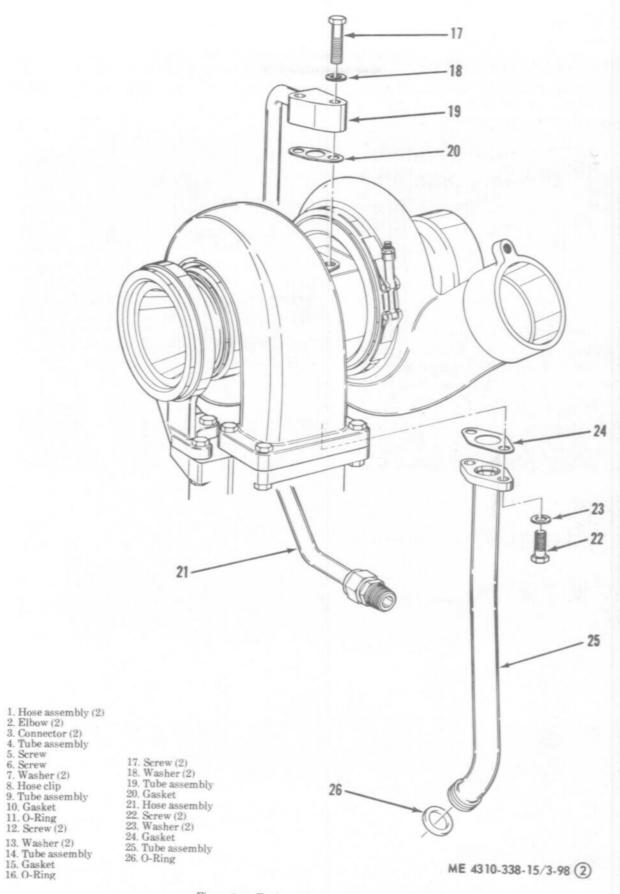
Engine oil lines and fitting, removal and installation (sheet 2 of 2).
